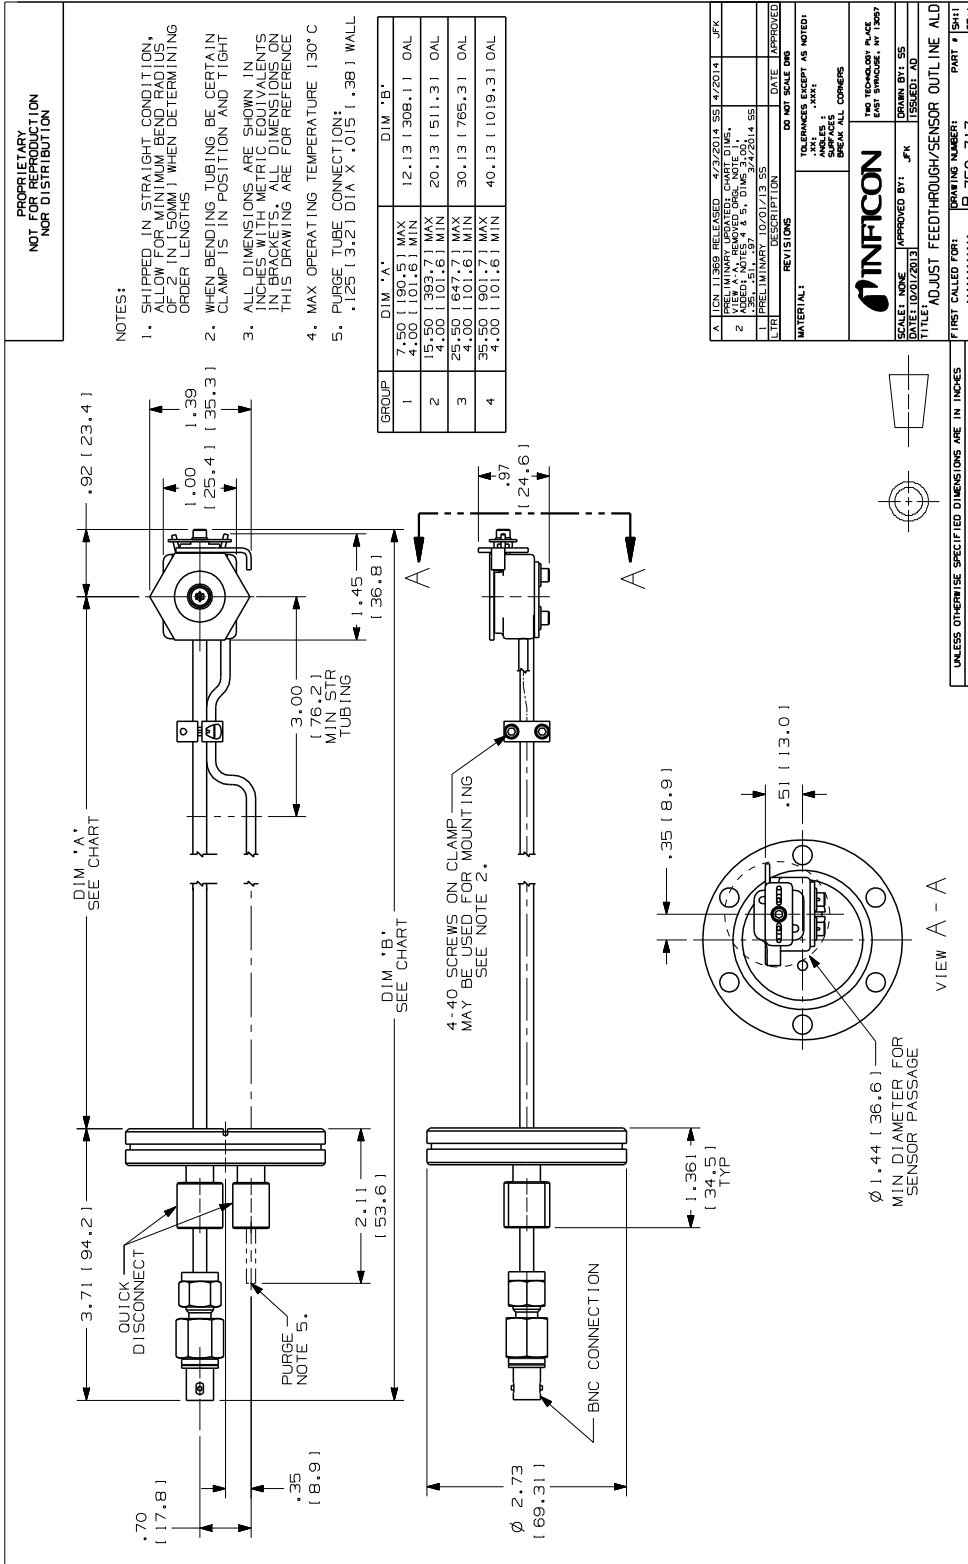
Adjustable ALD Sensor (PN 750-717-G2 and 750-717-G4) outline
